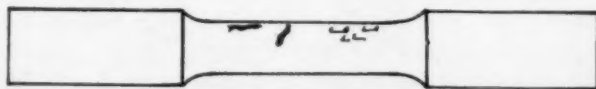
DEFECTS IN TEST BAR CASTING DUE TO USE OF TIGHT, WET AND HARD-RAMMED MOLDING SAND AND RESULTING IN SLAG, DROSS AND WATER VAPOR.
